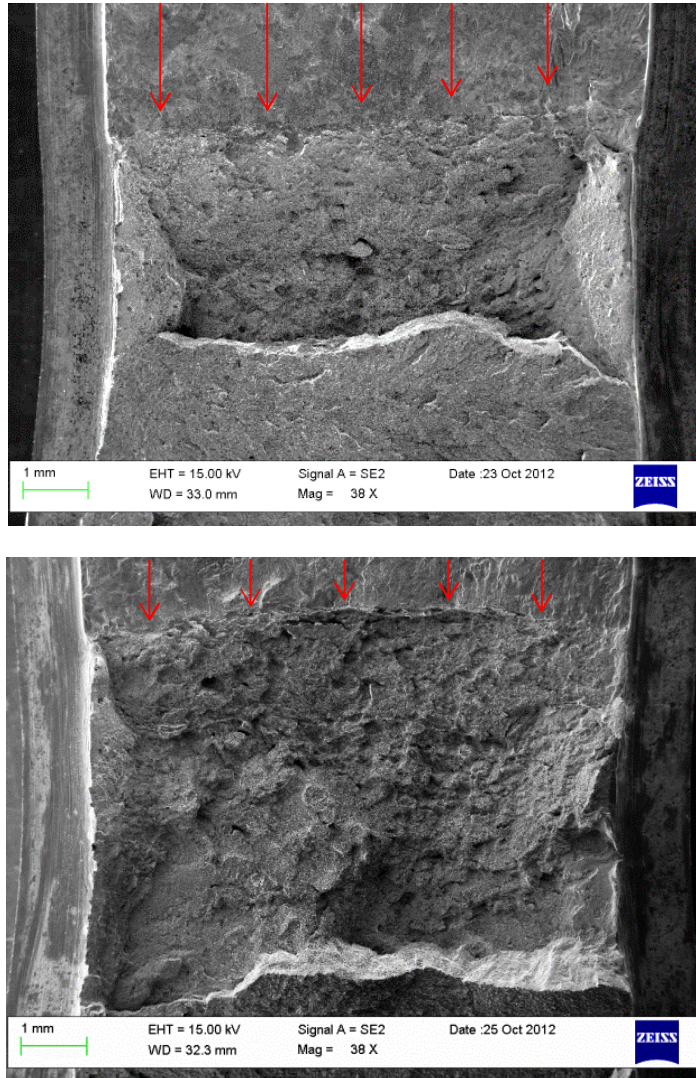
Ductile fracture surface of PU2 buttering layer specimen.
